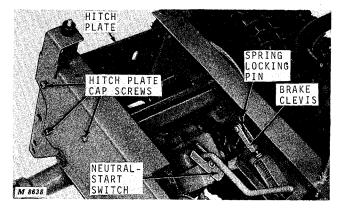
Preparing Transaxle for Removal (Right Rear Wheel Removed for Clarity)
